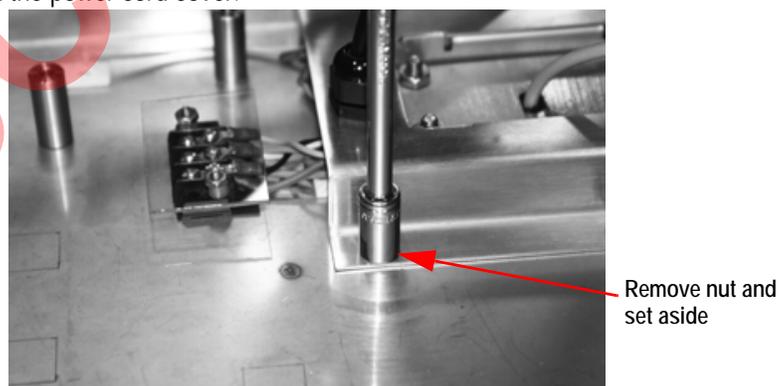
Remove Upper Nut of the Power Cord Cover Assembly
